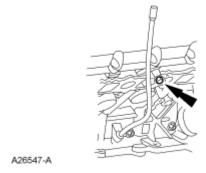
Identifying LH Exhaust Manifold Courtesy of FORD MOTOR CO.
